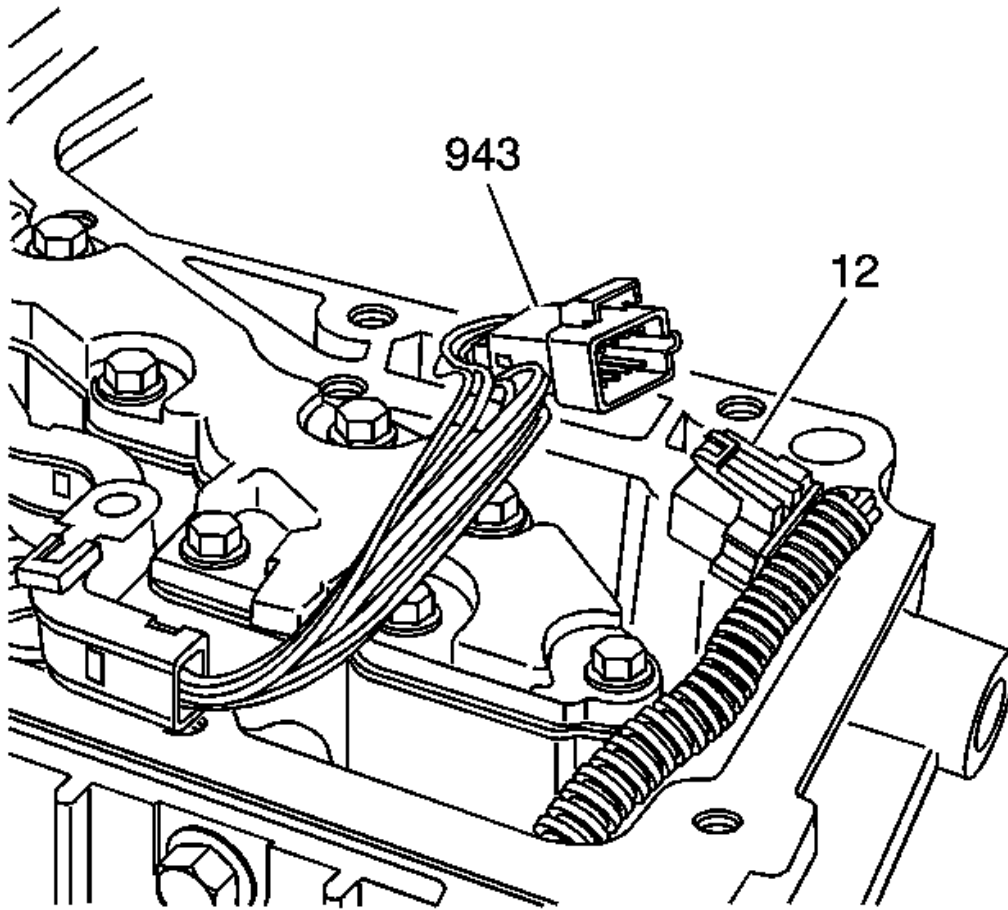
View Of Wire Harness Extension & Upper Control Wire Harness
